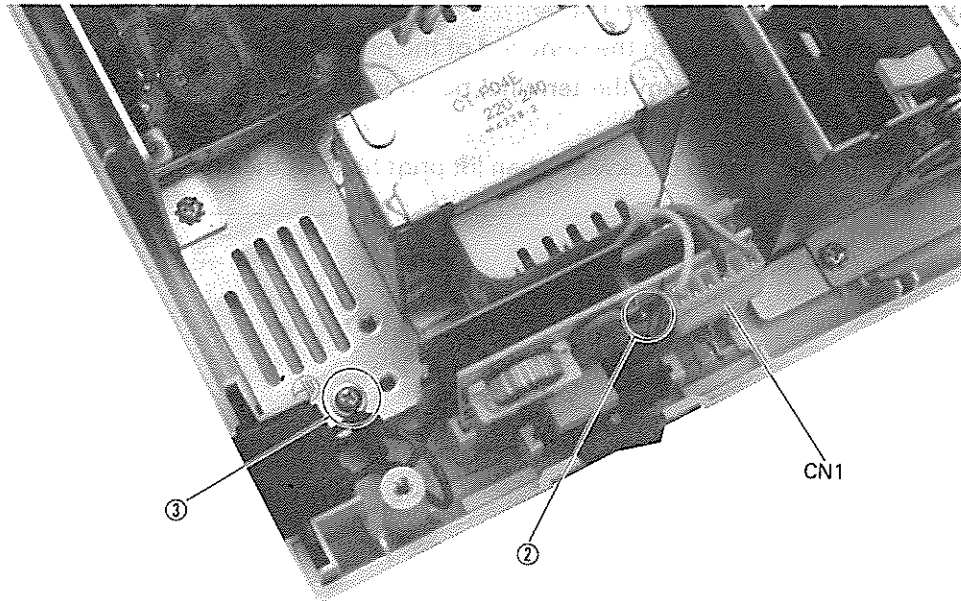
Removal of Filter Circuit Board (220/240V)
